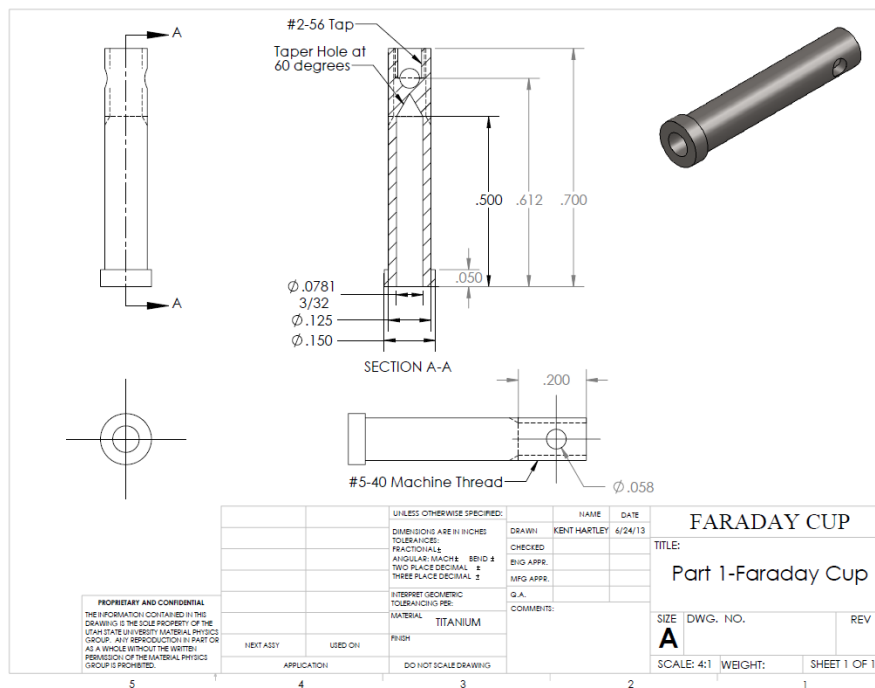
Sample of the drawings created for the current Faraday cup. This drawing shows the actual Faraday cup.
